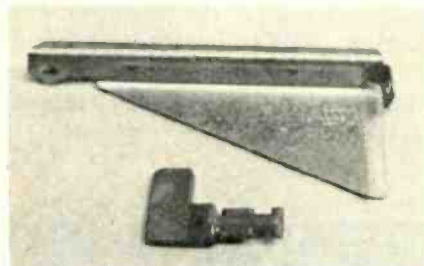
Before the M10 module can be slid out of its mounting tracks, these two parts must be removed. The bracket (at top) is bolted to the focus-control mounting and the cabinet's main framework. The key (below) must be rotated and pulled upward to remove it from the module.
